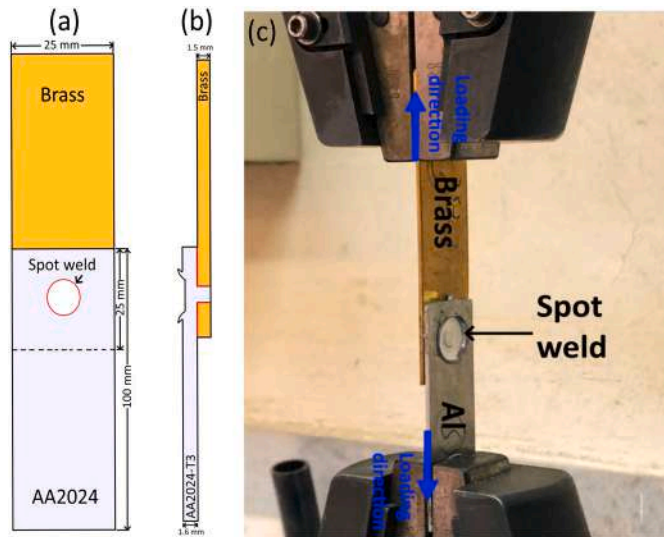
Dimensions of the tensile-shear test (the arrows depict the loading direction), and (b) tensile test machine.
